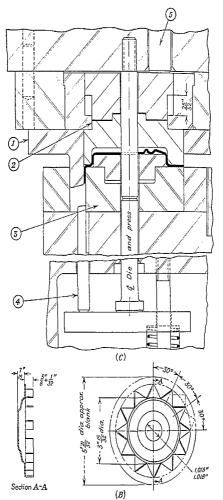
(Continued), (B) Part drawing; (C) flanging station. (Checoolet Division, General Motors Corp.)
